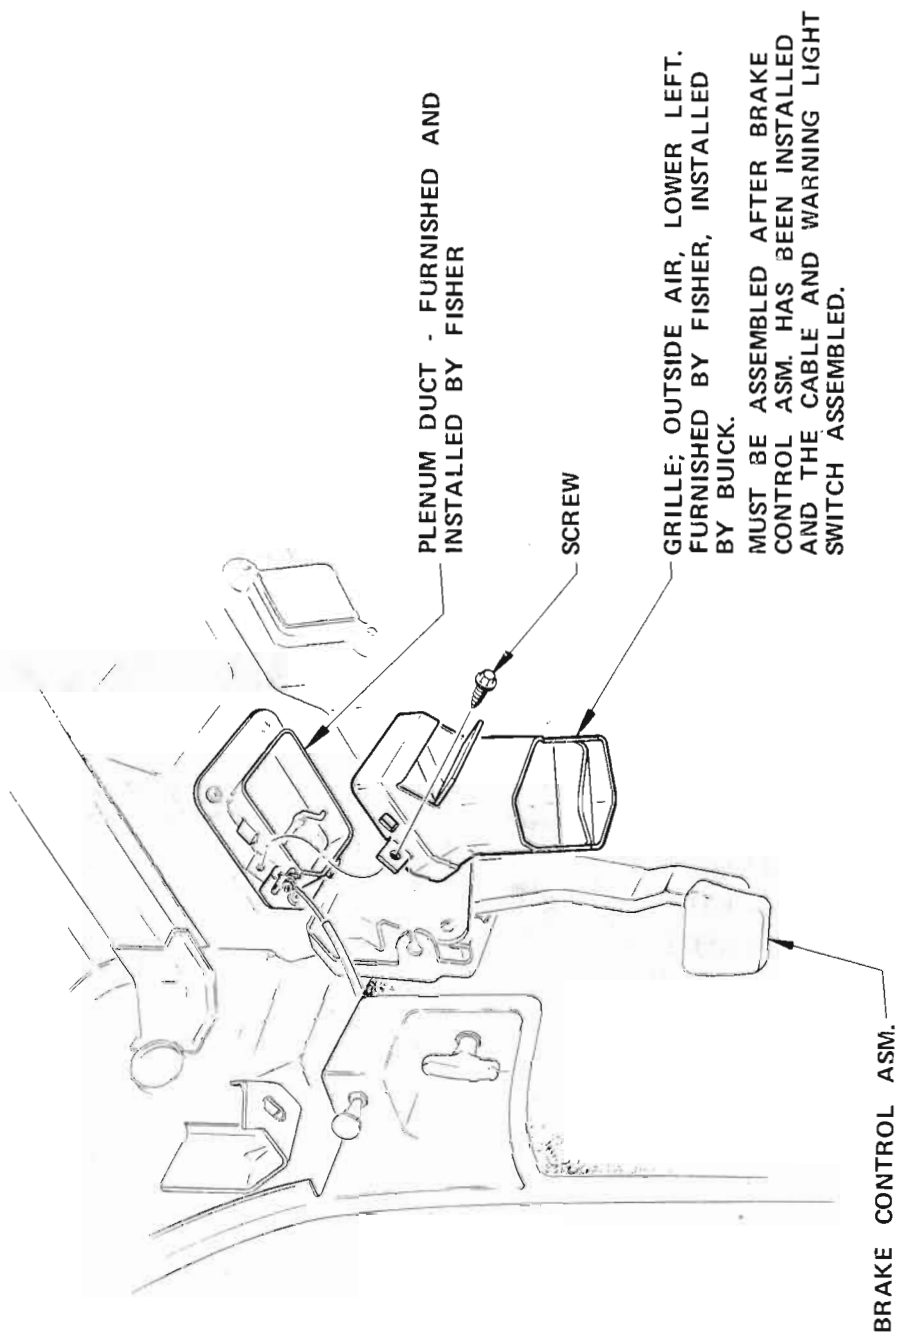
Instrument Panel Grille - Outside Air - Lower Left
